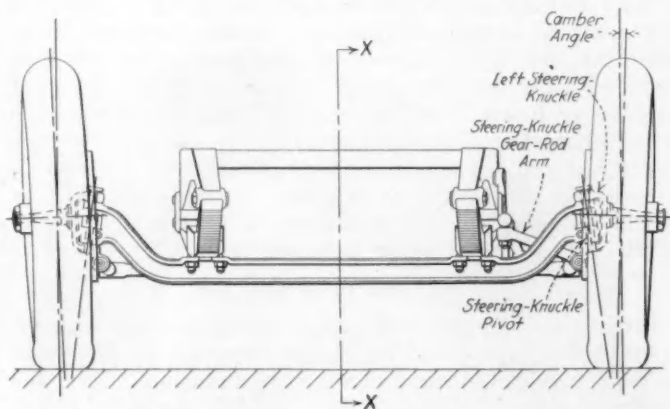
FRONT VIEW OF TYPICAL CHASSIS
